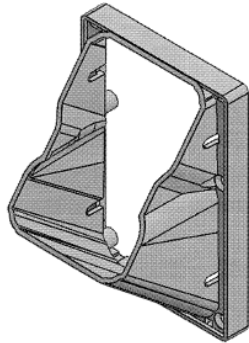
Architectural* Lower Bottom Stair Rail Bracket
